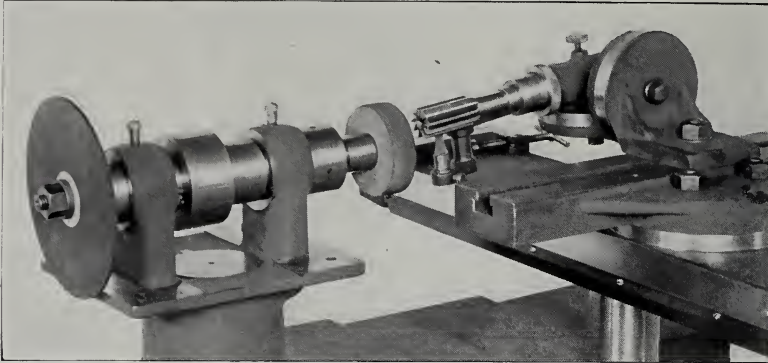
SHARPENING THE END TEETH OF AN END MILLING CUTTER
